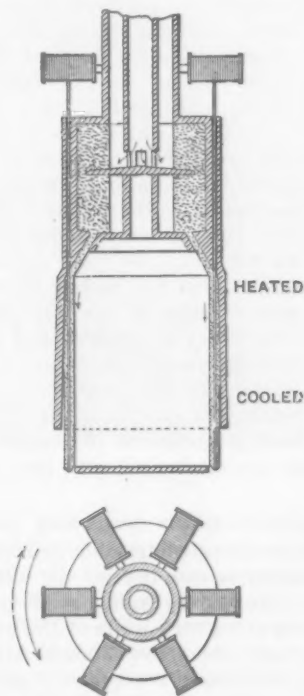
Section and Plan of Mold Used in Reinforcing Pipe Castings with Wire or Wire Fabric.
